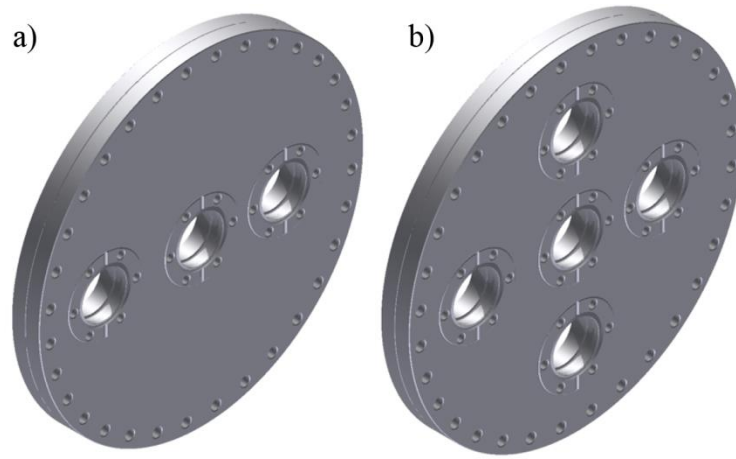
CAD drawings of a) the 12” CF side flange and b) the top flange used to seal the main diffraction cube.
